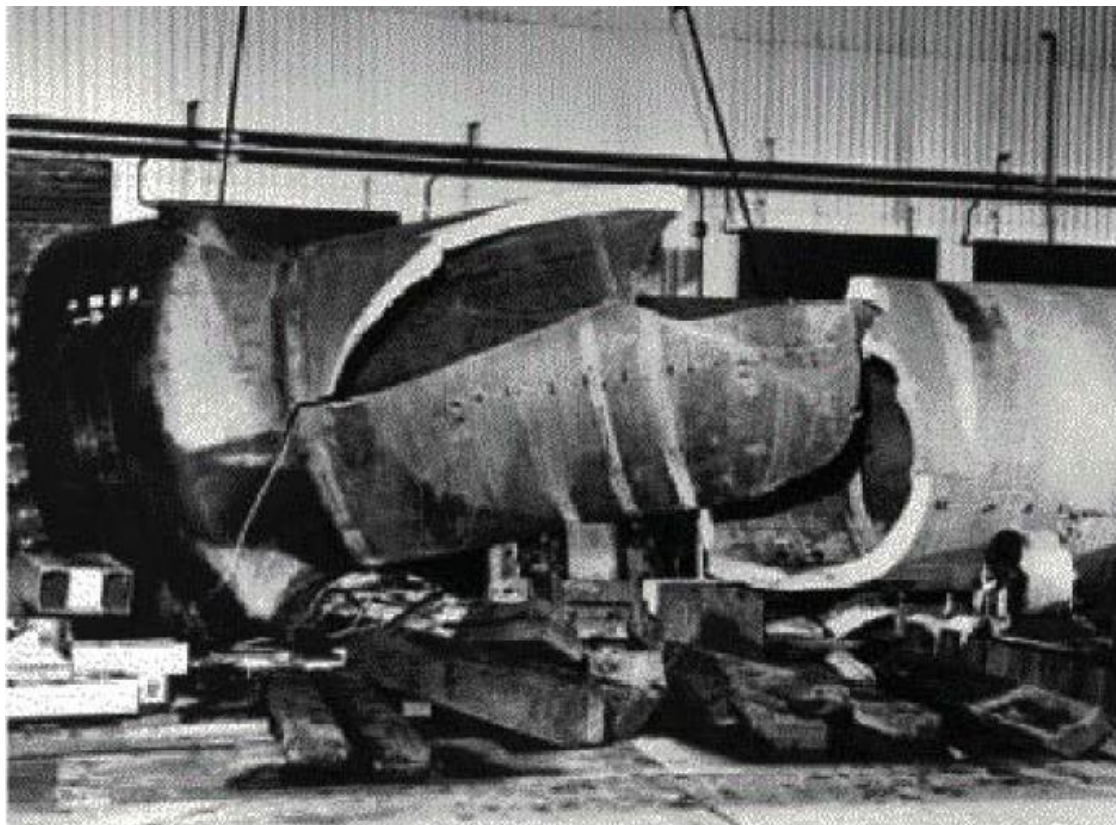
Steel pressure vessel, 1.7 m in diameter and 15 cm thick, that failed during a hydraulic proof test at 34 MPa. The crack that caused the accident grew from a small (5 mm) embedded welding crack
